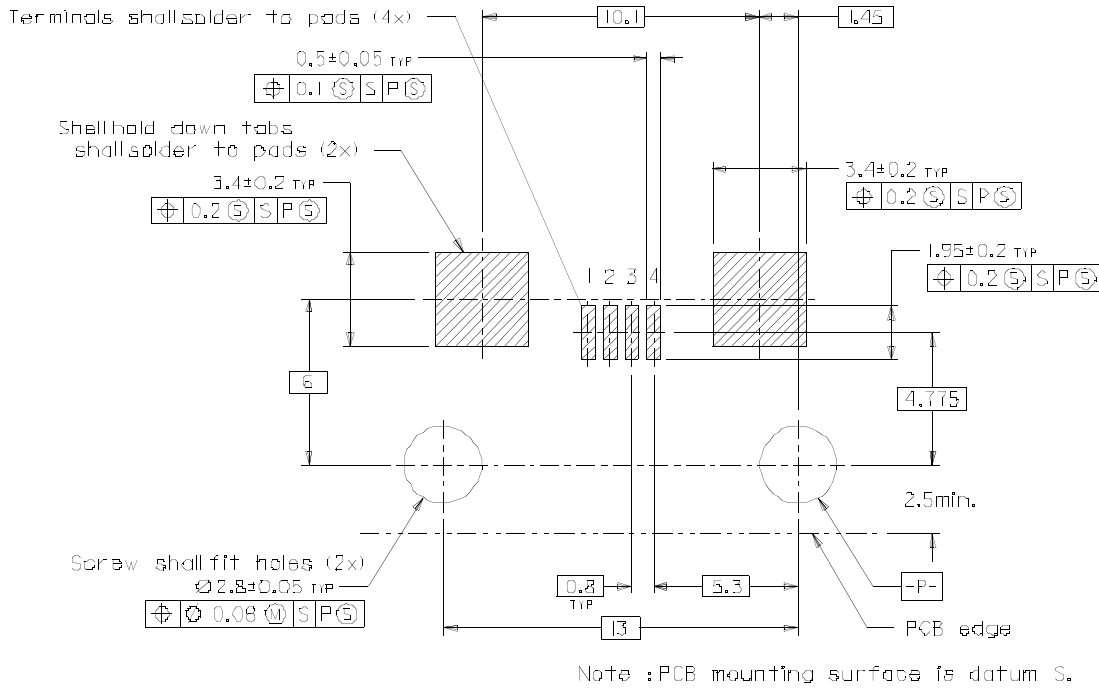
Flat surface mount printed circuit board connector footprint
